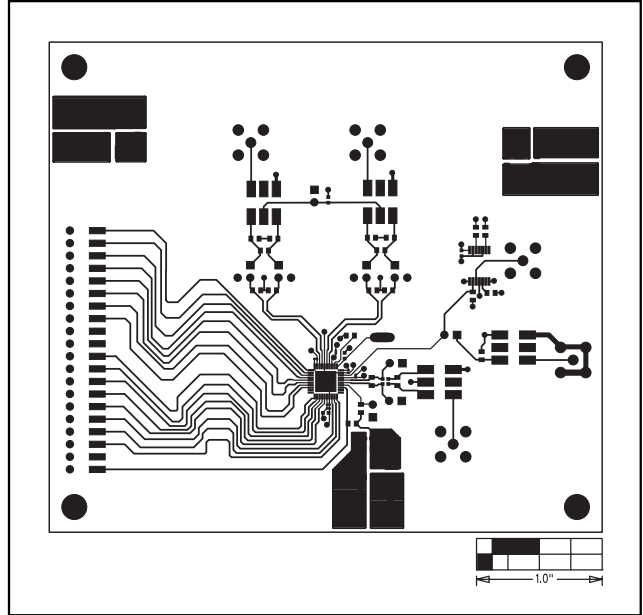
MAX5852 EV Kit PC Board Layout—Component Side (Layer 1)
